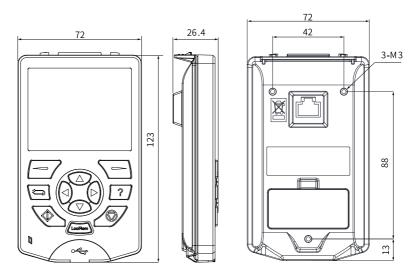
Dimensions of the SOP-20-810 (unit: mm)
